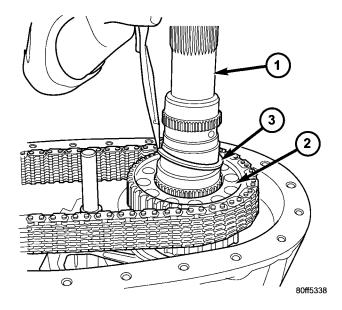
Remove Rear Output Shaft Sprocket Retaining Ring
